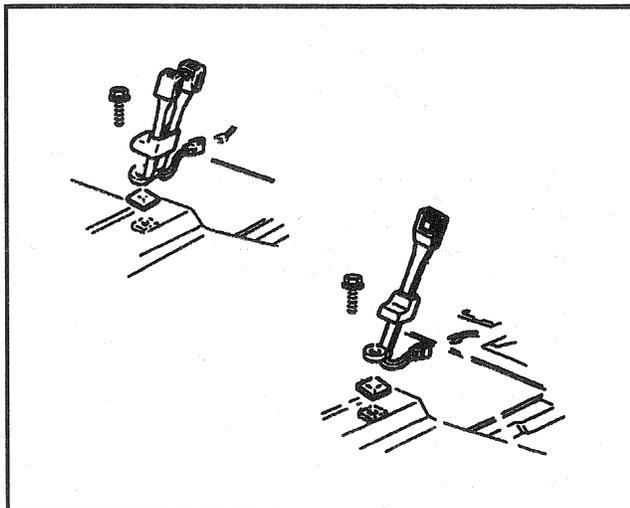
Front Seat Belt Attachments Regular Cab with Bench Seats
